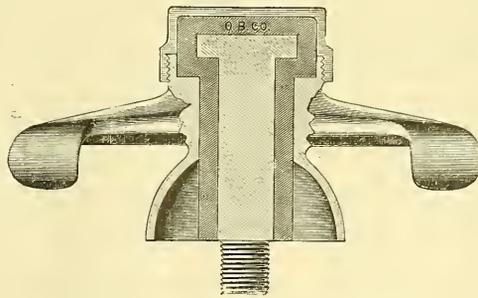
SECTION STRAIGHT-LINE HANGER.
